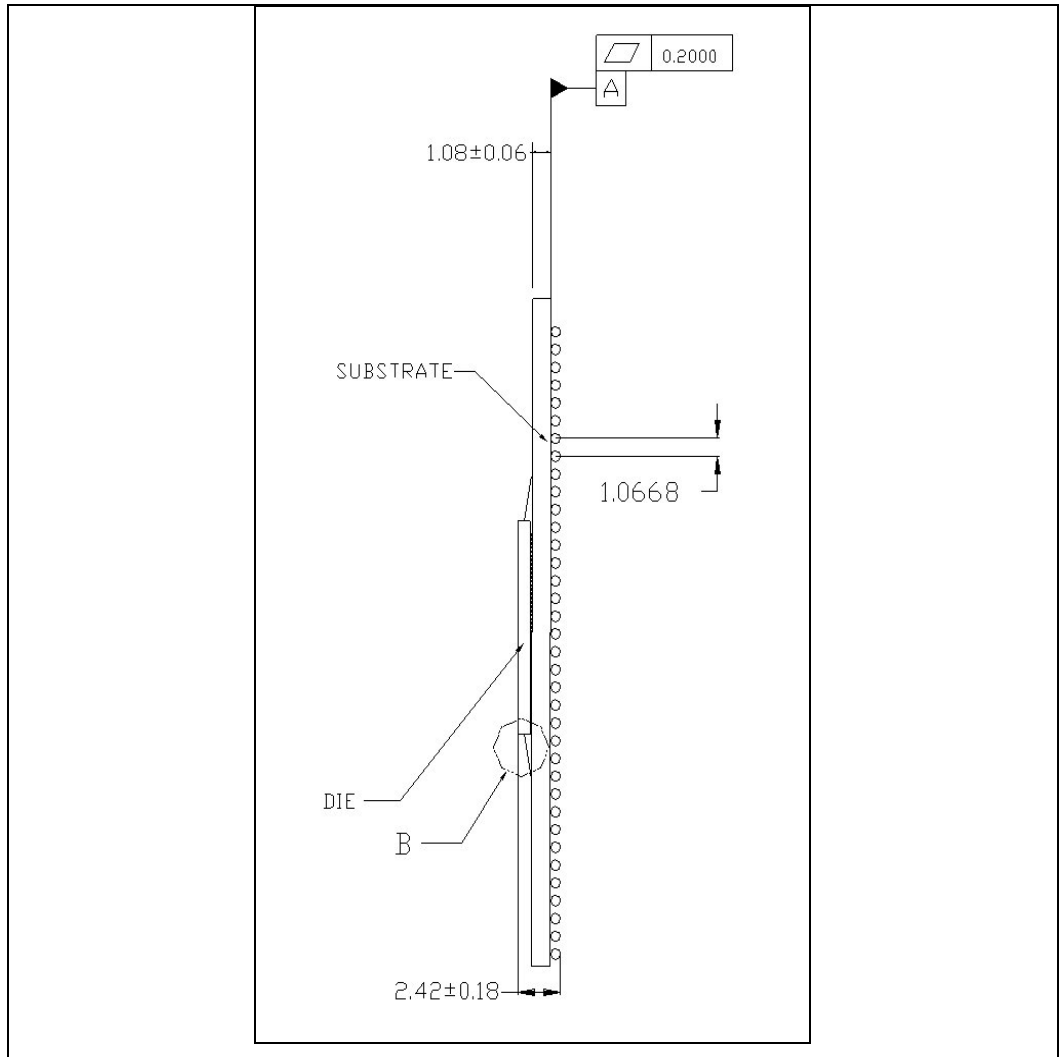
Mobile Intel 915PM/GM/GME/GL and 910GML Express Chipset Package Details B & K
